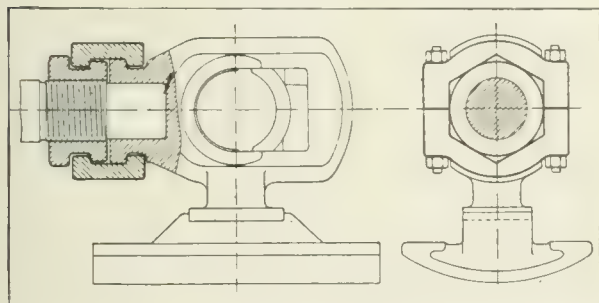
Details of the New Connecting Rod Coupling and Cross Head.
